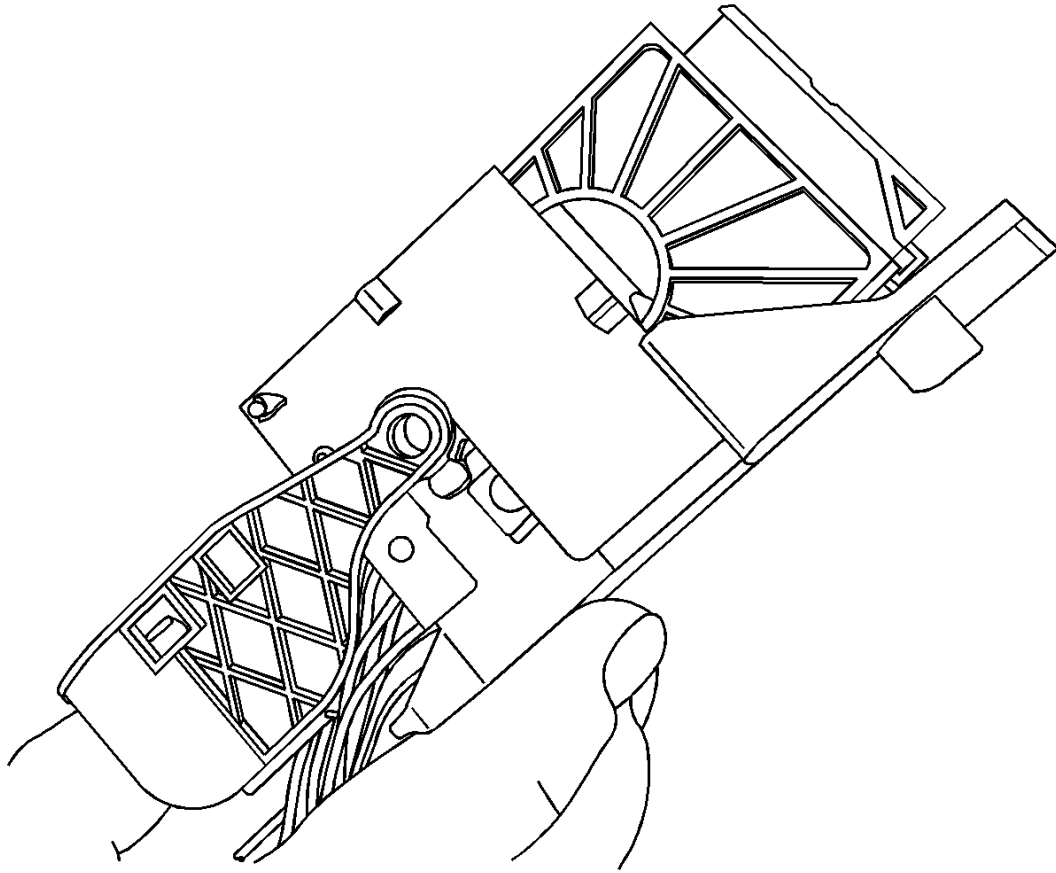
Aligning Guide Plates To Mesh With Locking Lever Gears
